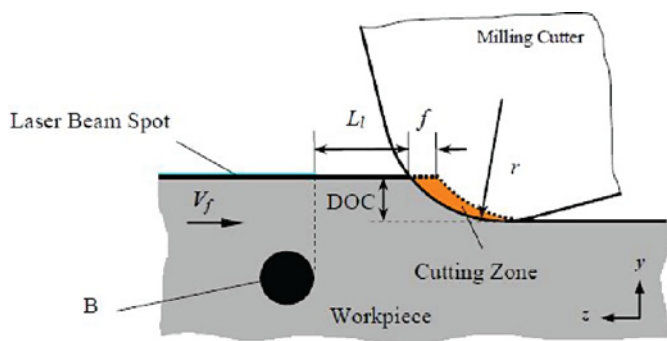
Schematic of laser assisted cutting (Reproduced from [60])
